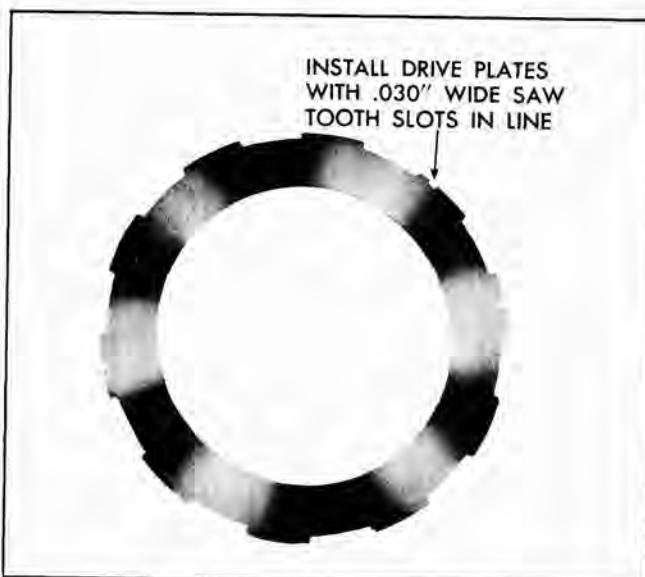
Notches in Rear Unit Clutch Driven Plate
